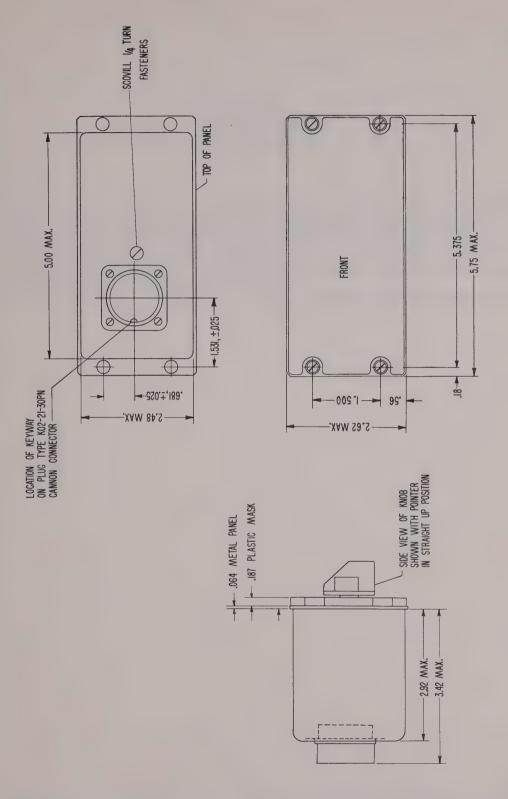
Type CON-1L-() Controls, Dimensional Outline Drawing
